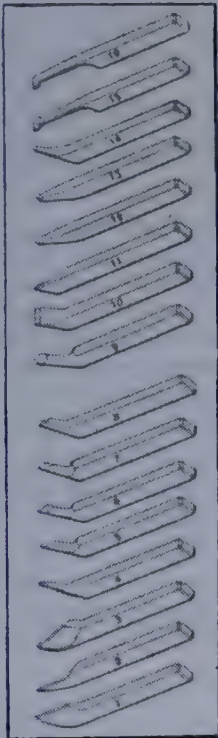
Hand Forged Lathe Tools—a complete assortment.
